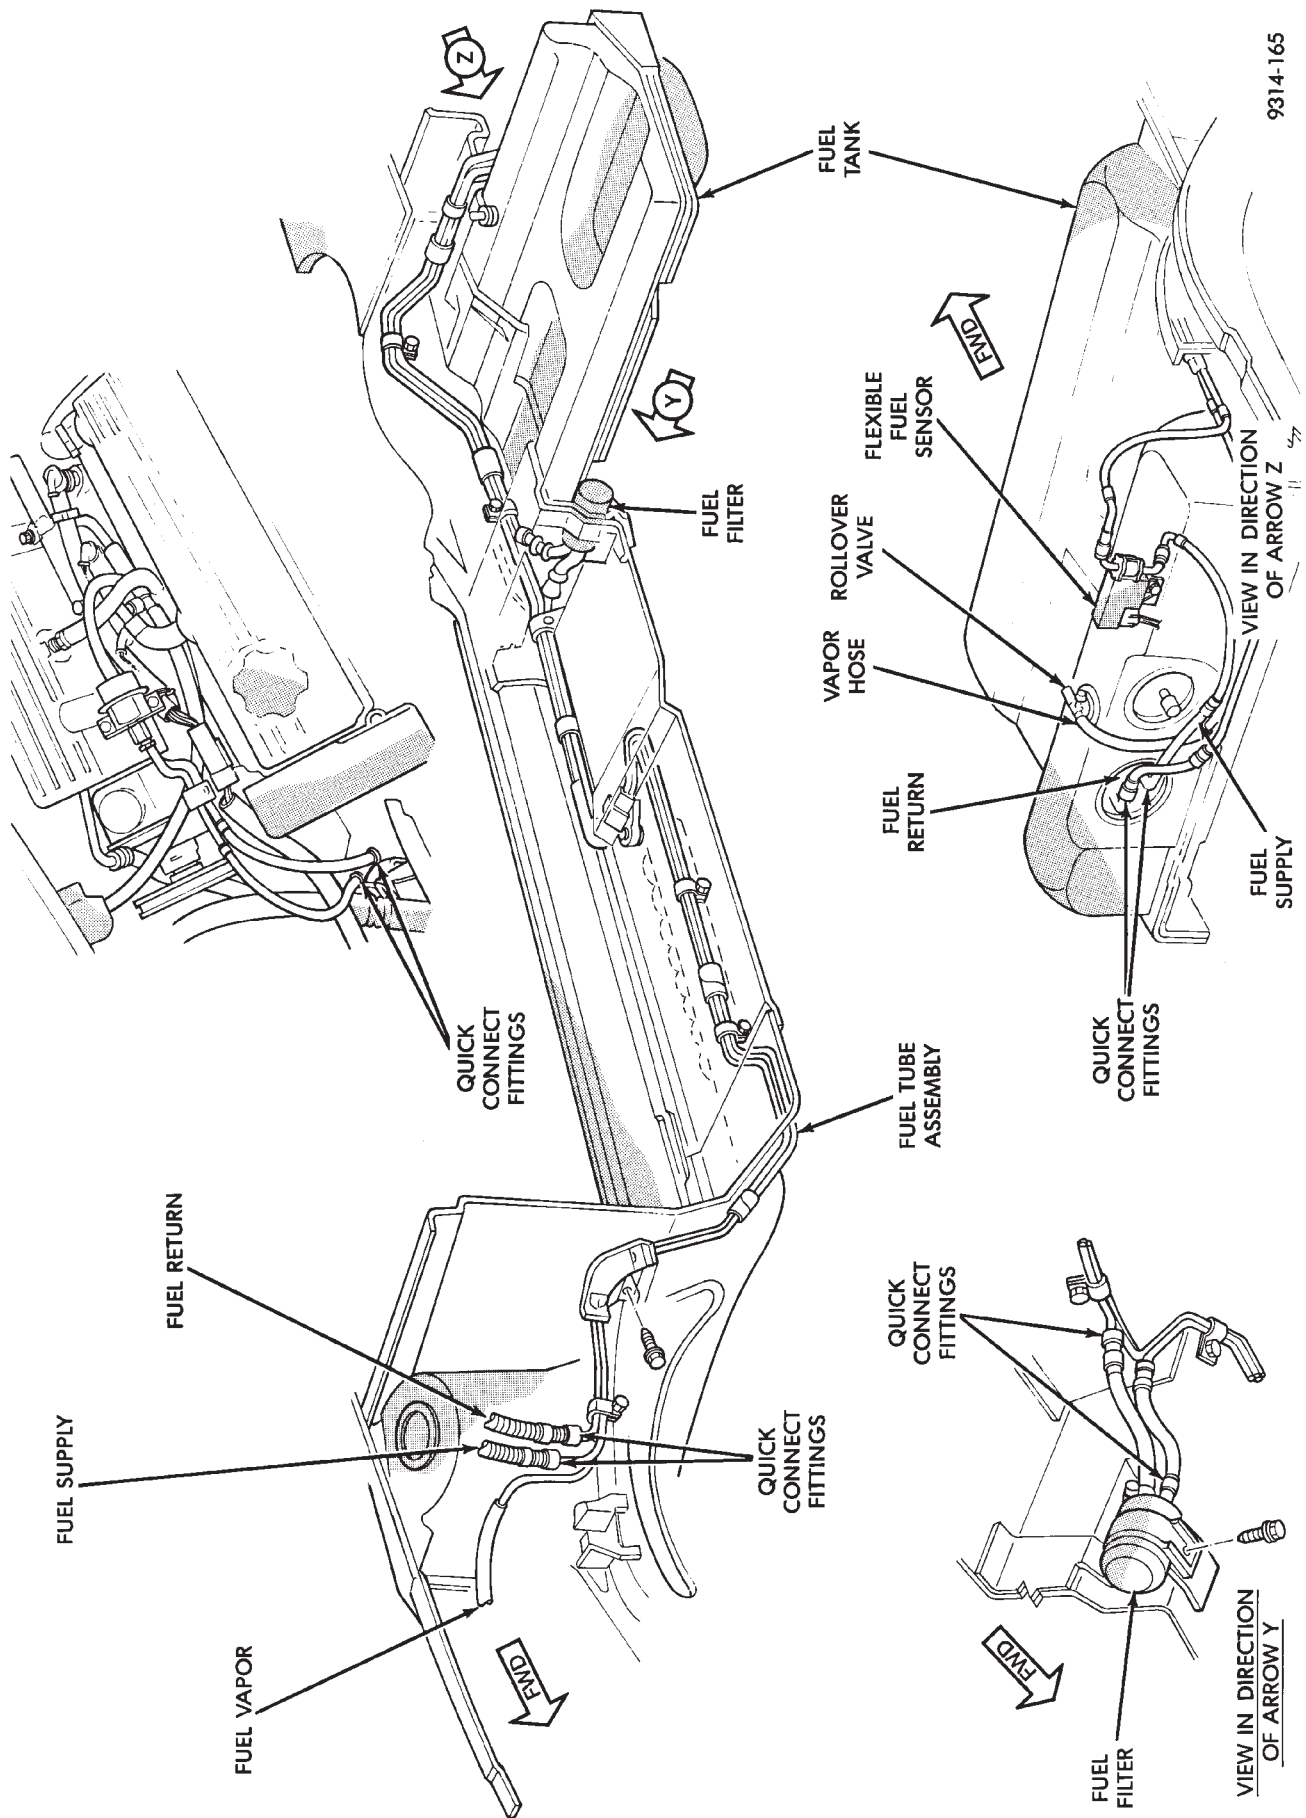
Fuel Tank, Filter, and Chassis Line Routing—Flexible Fuel AA-Body
